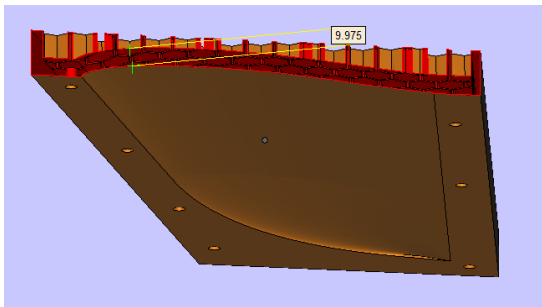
A section view of a of the printed mold CAD file. The surface thickness is 10mm.
